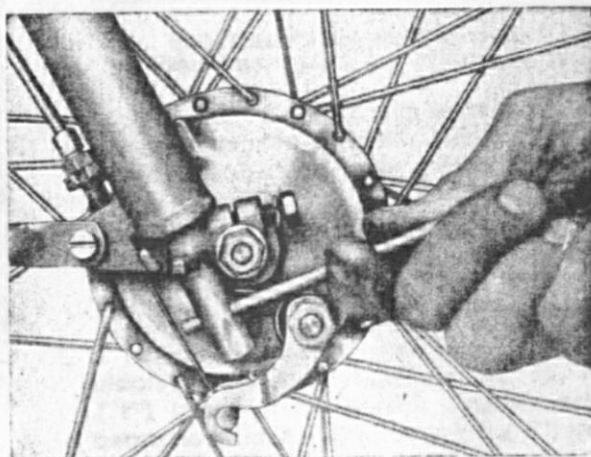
Loosening the spring supporting bolt in the telescope front fork
